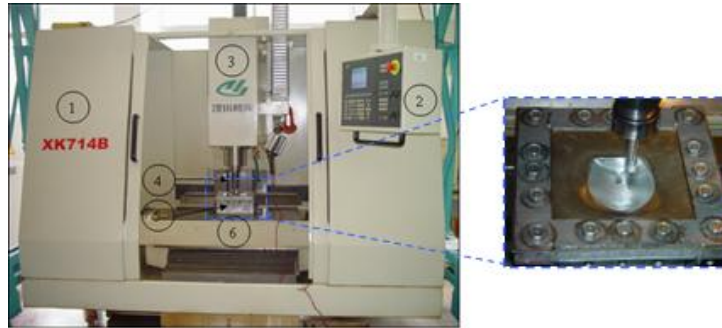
The CNC milling machine used in the experimental campaign (1) CNC machine, (2) Machine controller (3) Movable head, (4) Tool holder (5) Forming frame (6) Machine table
